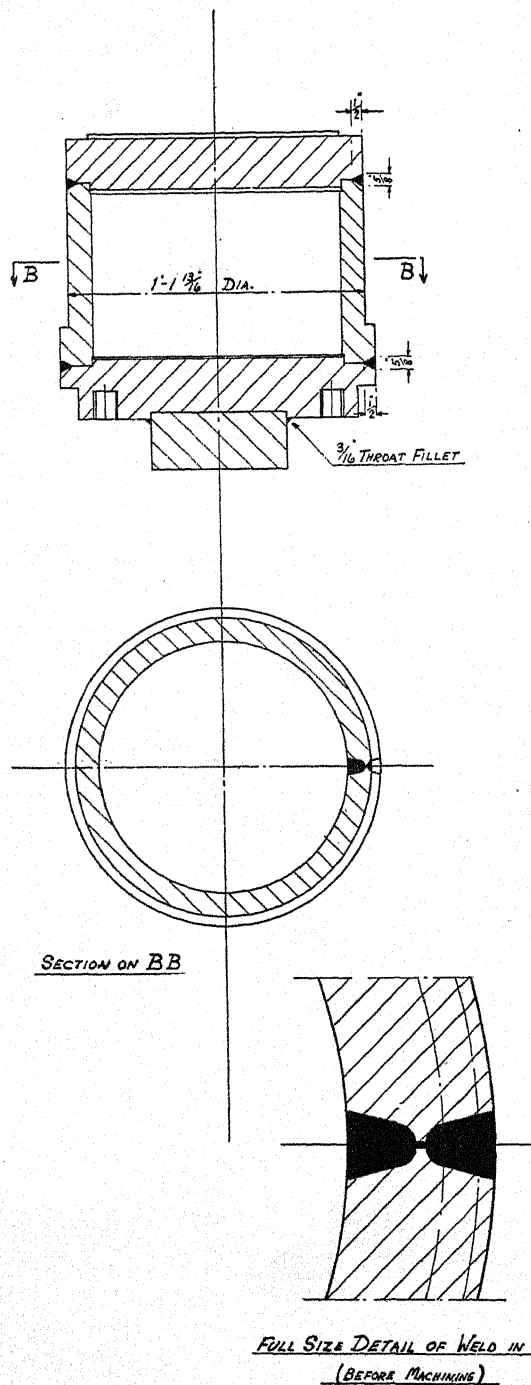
Details of welded riveting machine—the ram. See also page 999b.
